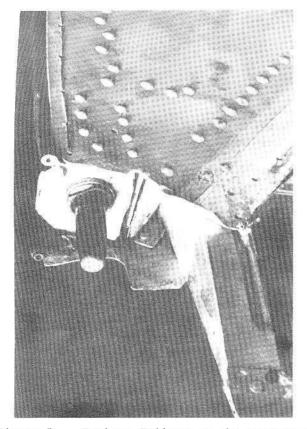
Fatigue Failure at the Rear Wing Attachment Bold.
